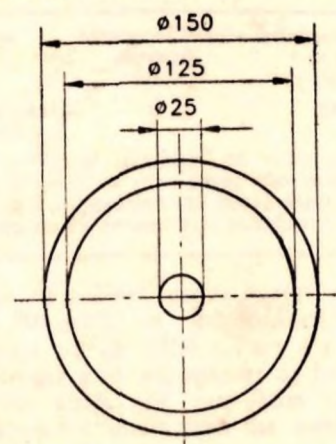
DESIGN TO BE PAINTED ON TEST PIECE
